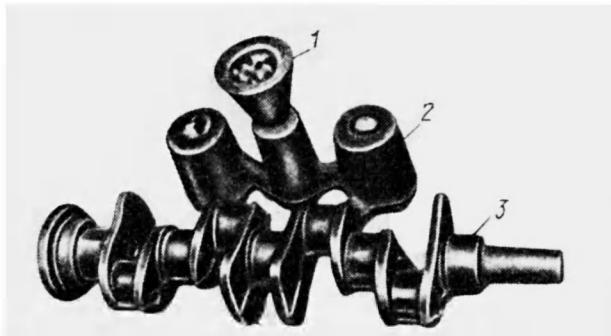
Nodular-iron crankshaft casting with gates and risers
